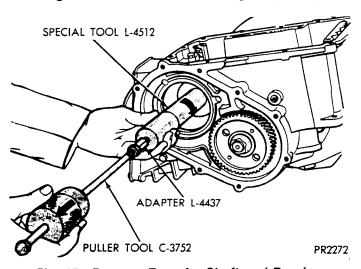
Remove Transfer Shaft and Bearing Retainer Assembly
